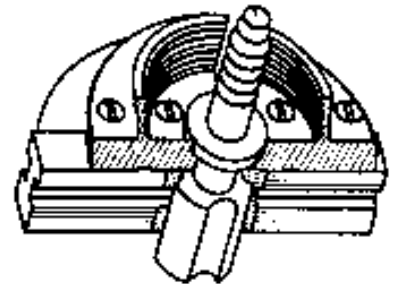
You can grip with the aid of a special screw in holder threaded into the bottom.
